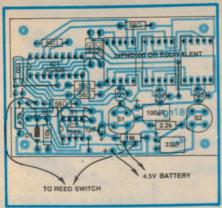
parts layout for the PCB. Don't forget the three wire links and take care when installing the polarised components.
